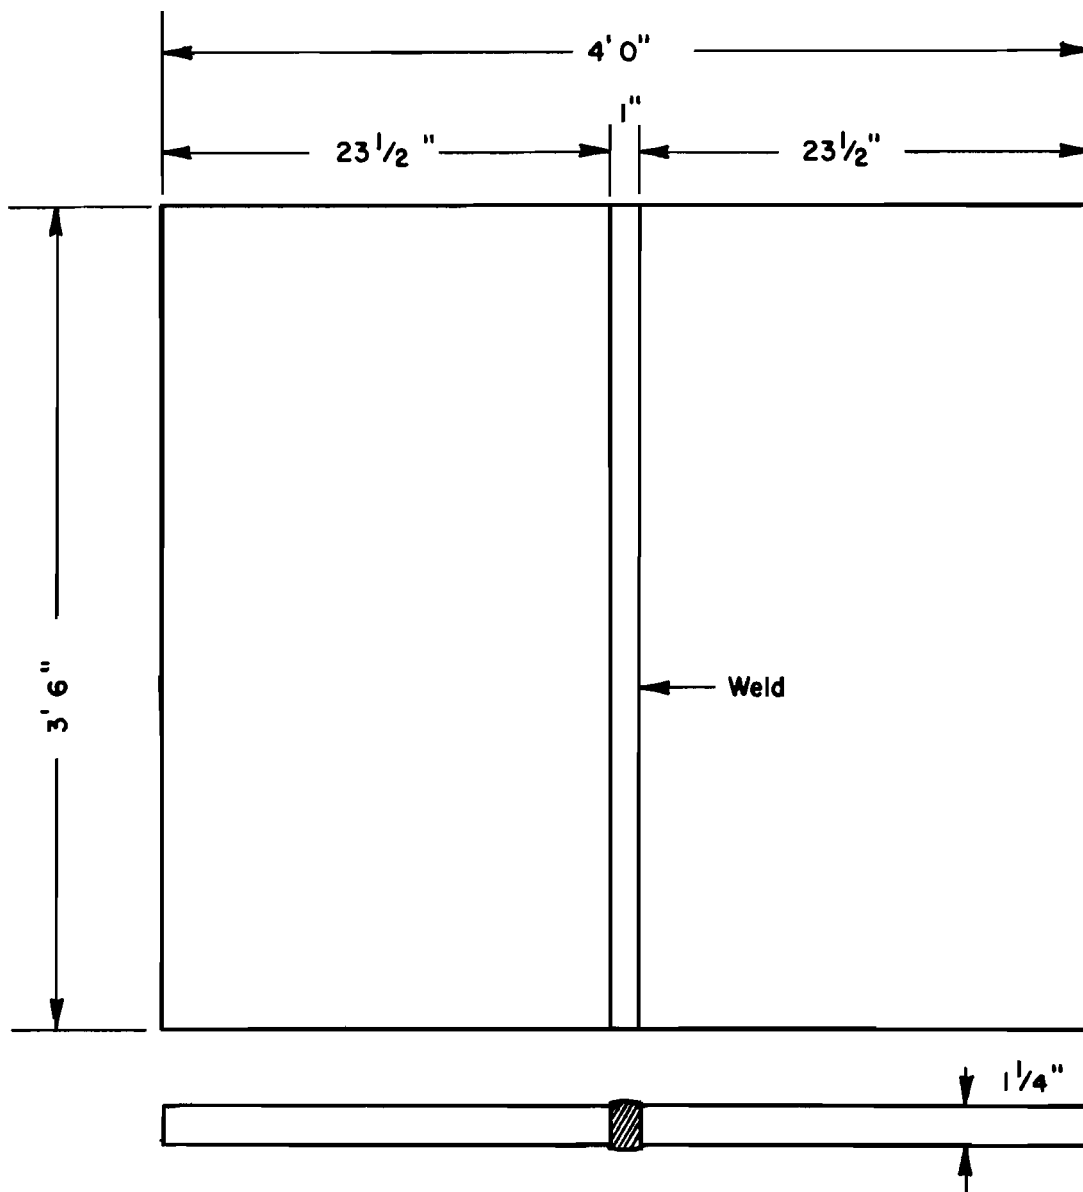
Details and dimensions for each of the six electroslag weldments.
